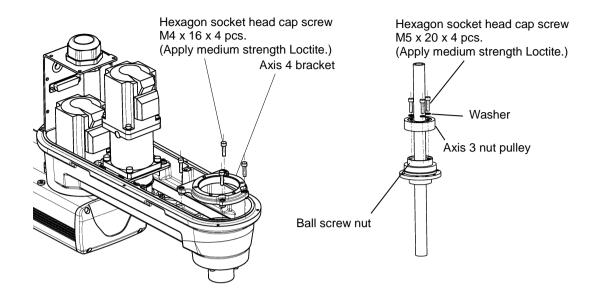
Axis 3 bracket and pulley (KHL-500, KHL-600, KHL-700)
